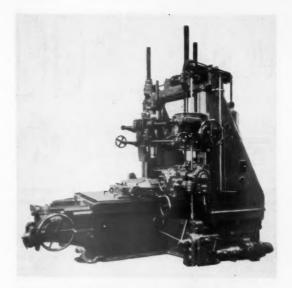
Large three co-ordinate jig boring machine first built in 1933.
